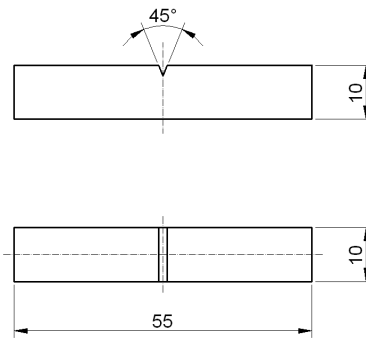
Charpy V-Notch ISO 148-1 Samples dimensions
